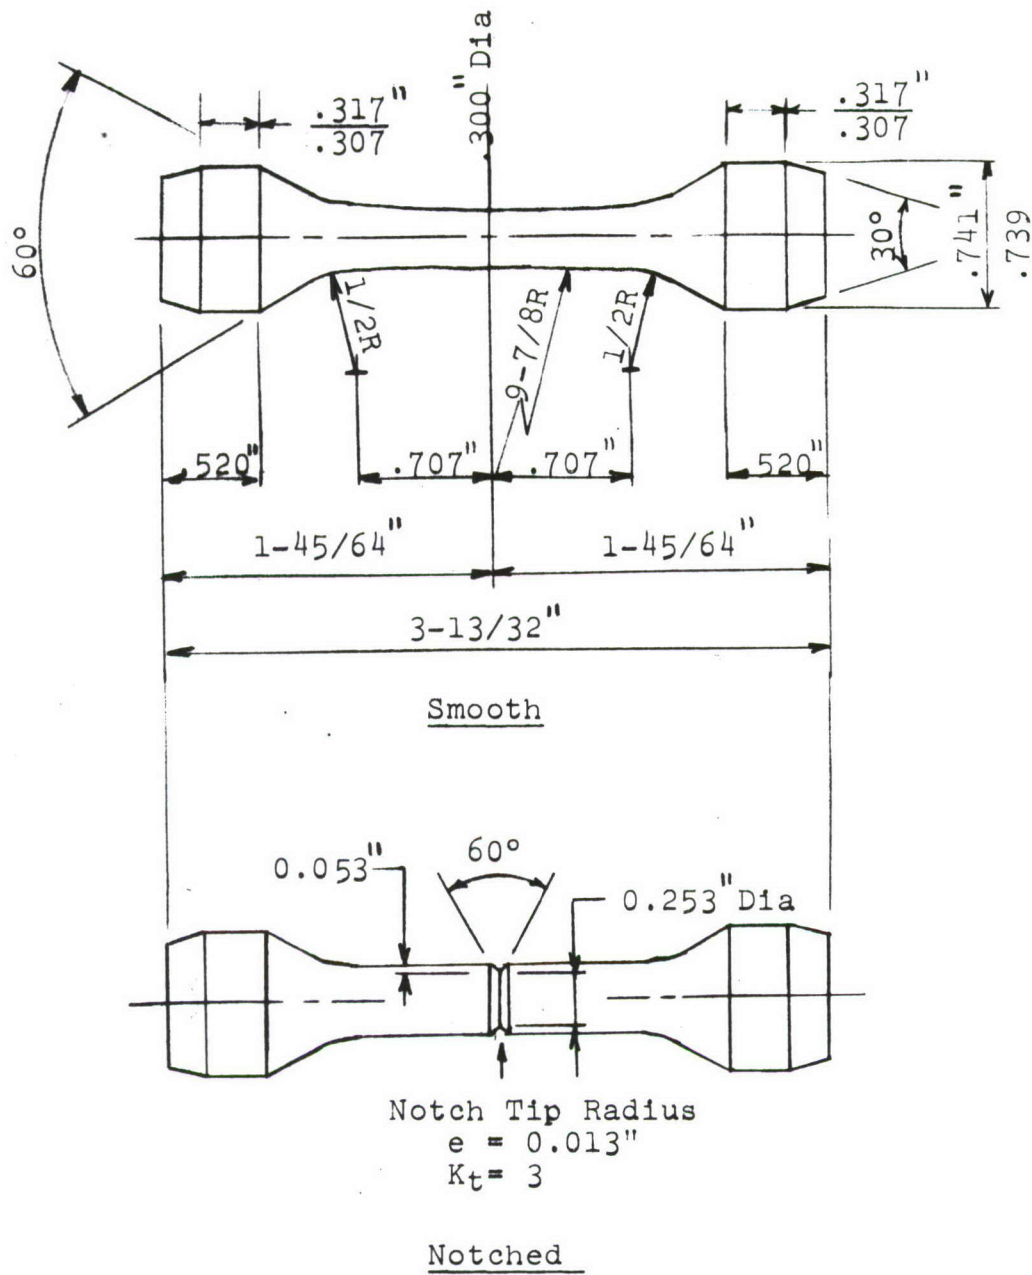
Smooth and Notched Axial-Stress Fatigue Specimens
